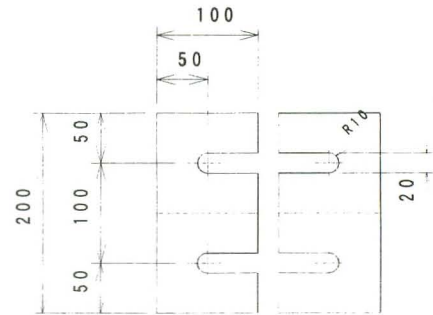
Dimensions of chloroprene rubber sheet (unit: mm)
